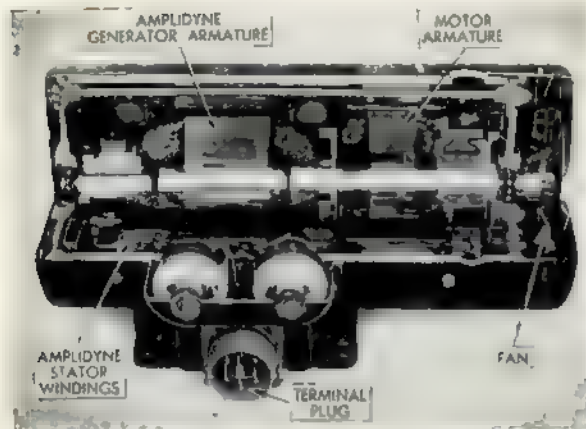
Motor-generator used for powering gun-turret drive motors.
